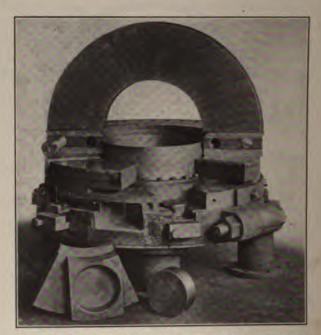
Thrust Bearing, 48-inch Diameter, Made in Halves with Wedge Adjustment for the Shoes
